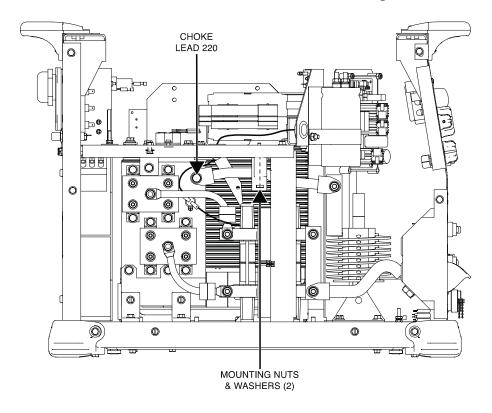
Switch board and heat sink assembly mounting screw locations
